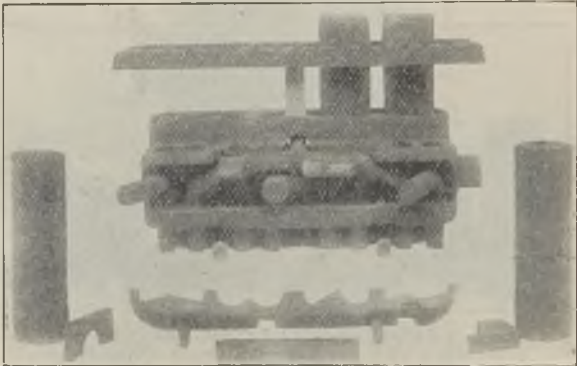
A COMPLETE SET OF CORES ROUGHLY ASSEMBLED.
